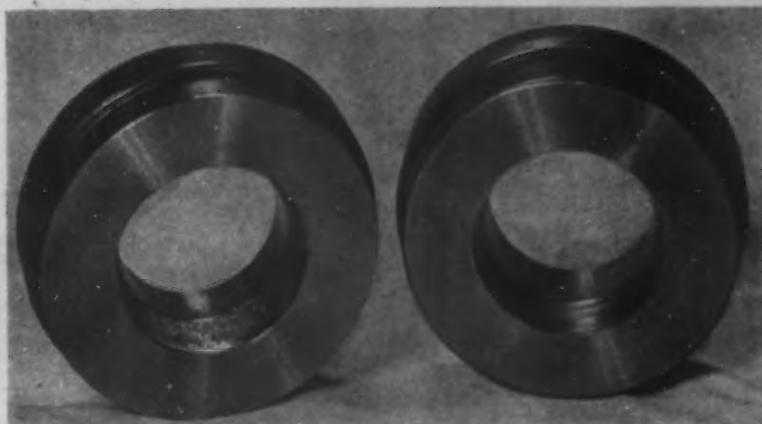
Comparison between tool steel and graphitic steel dies. The tool steel die on left made 10,000 pieces, and the graphitic steel die on the right made 309,000 pieces.
